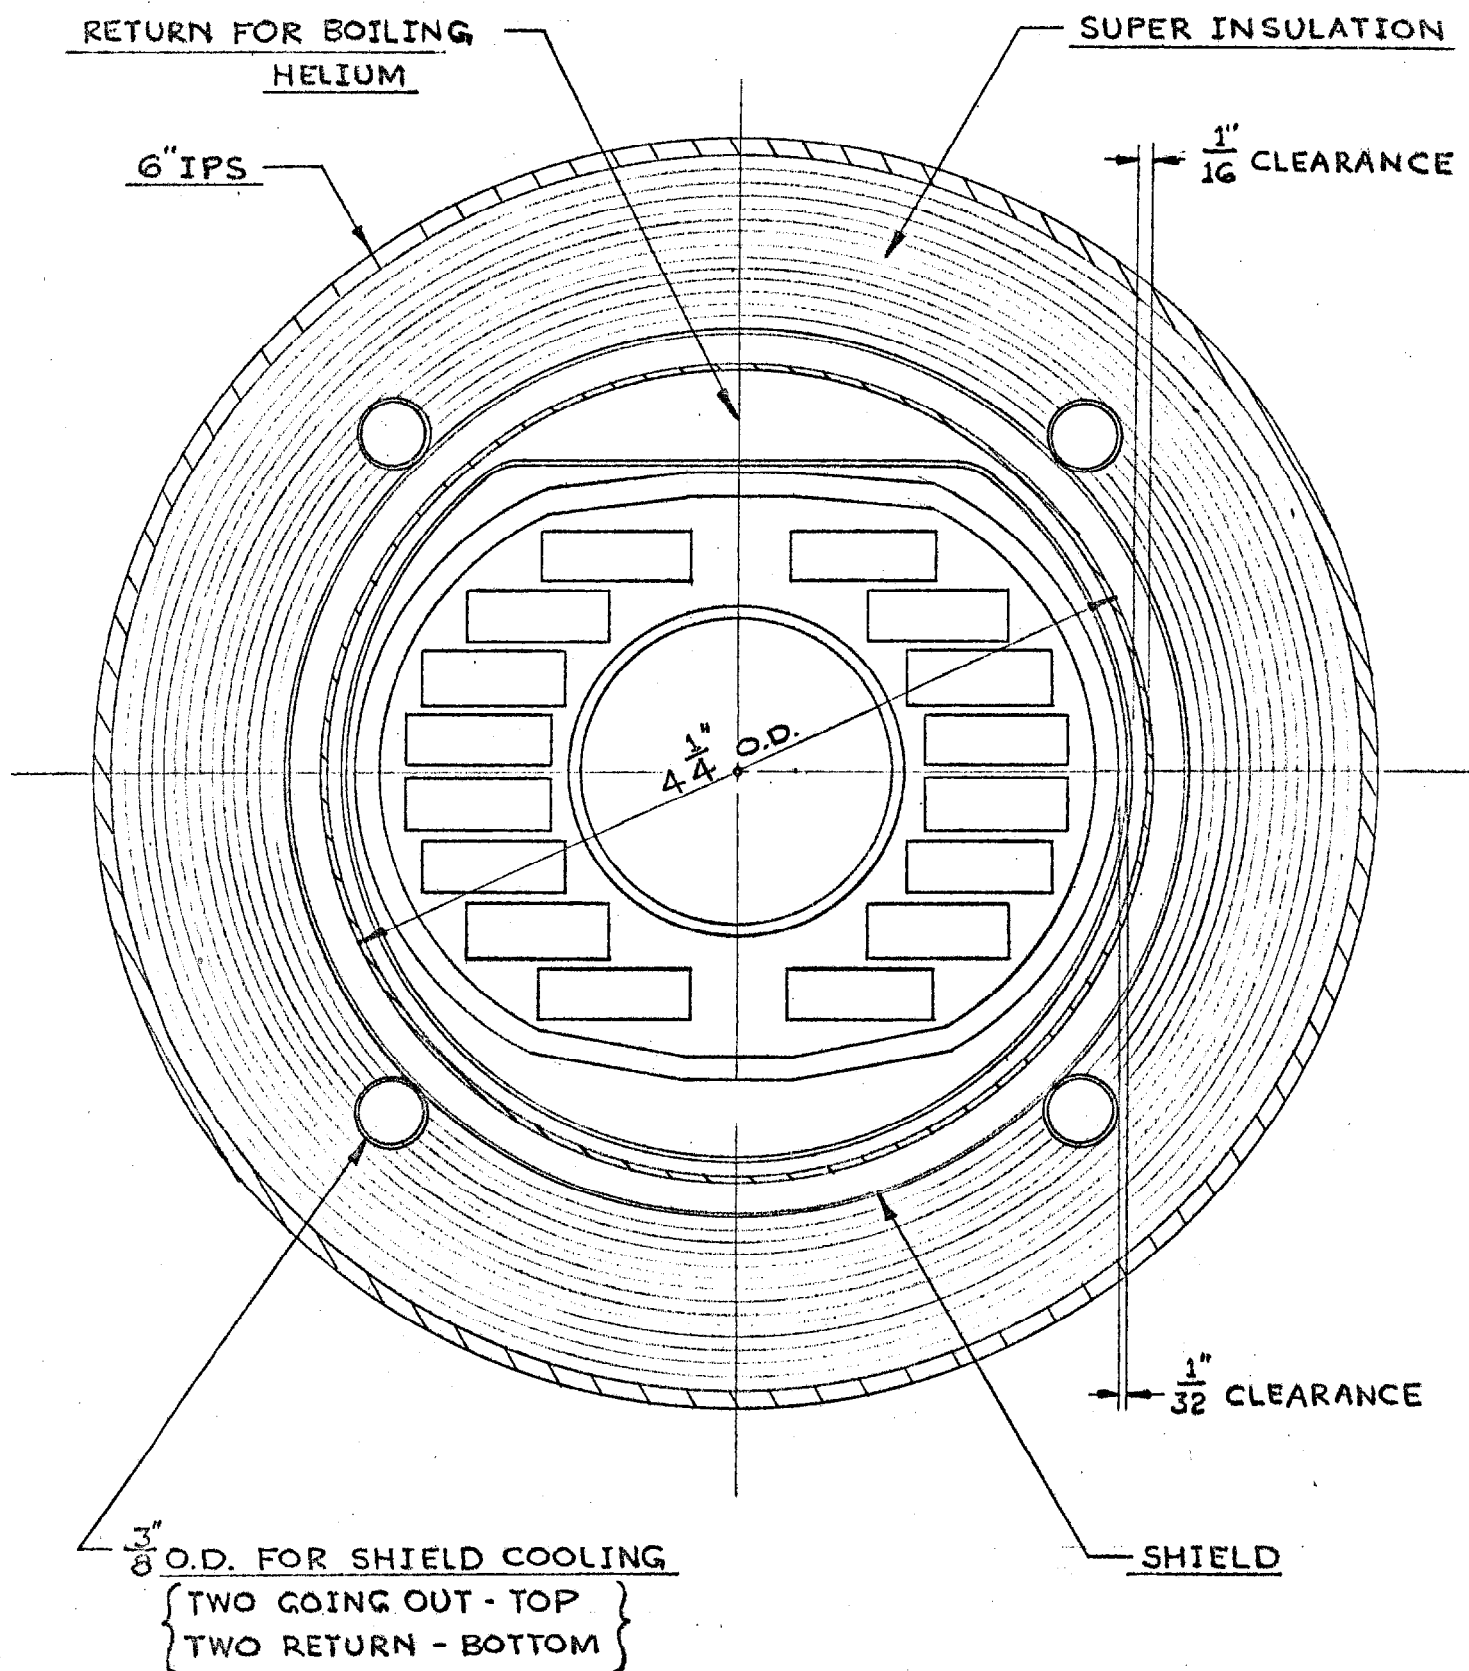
MAGNET ASSEMBLY CROSS-SECTION
